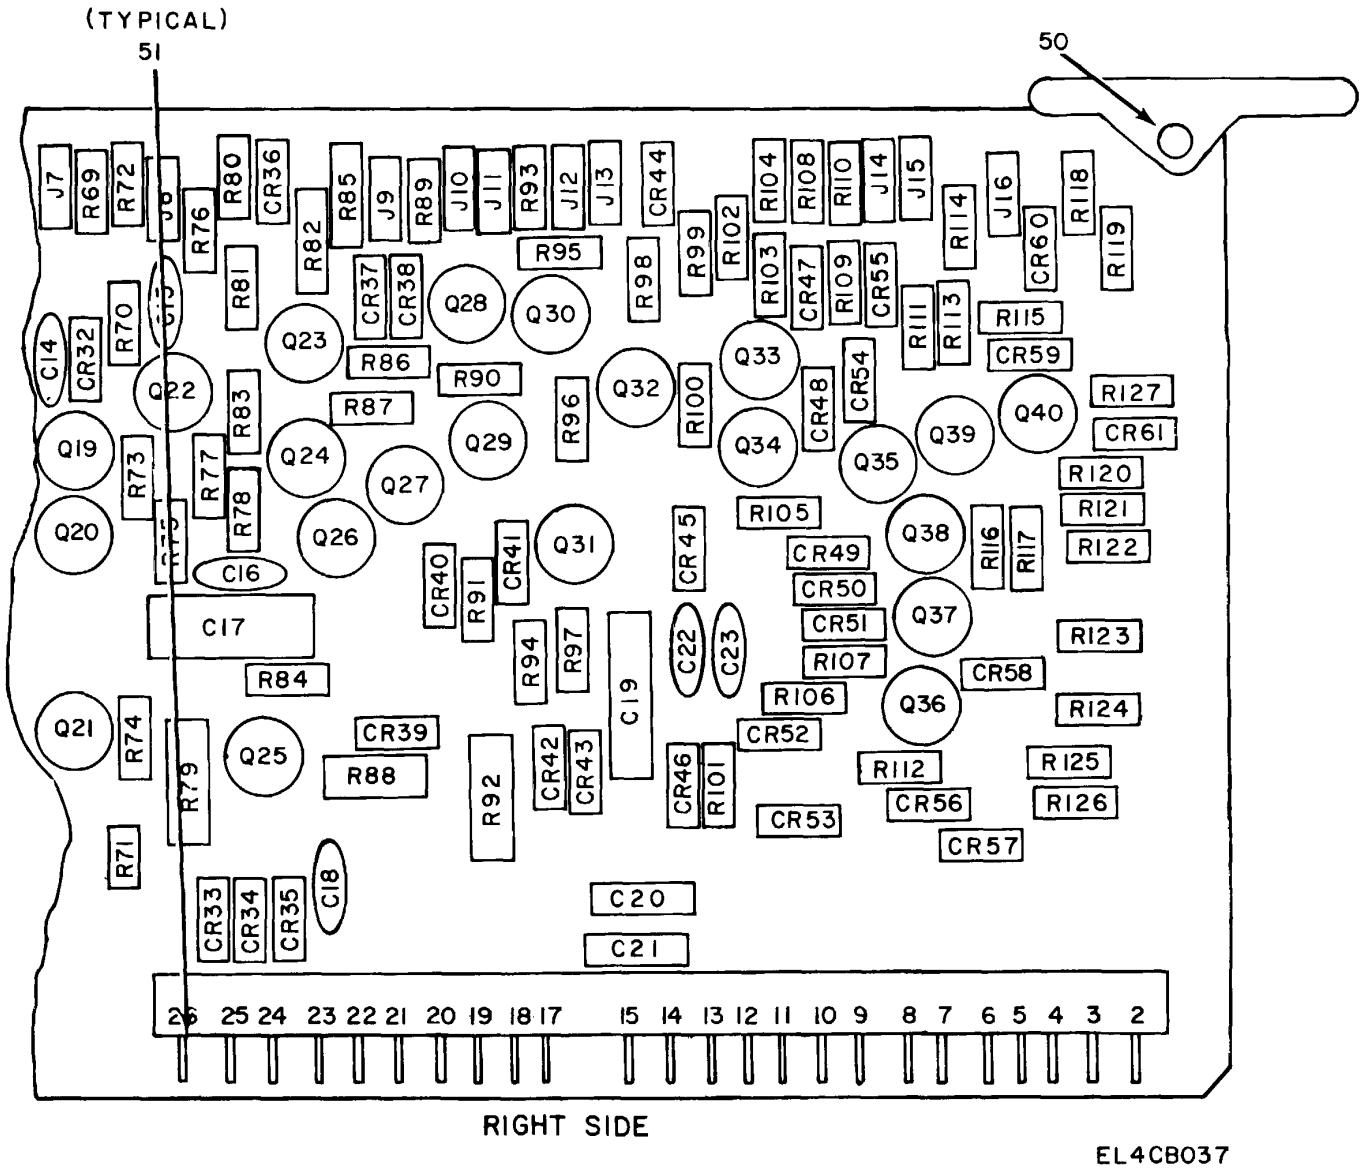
Electrical Synchronizer Subassembly PL-1123/G (Sheet 2 of 5)
